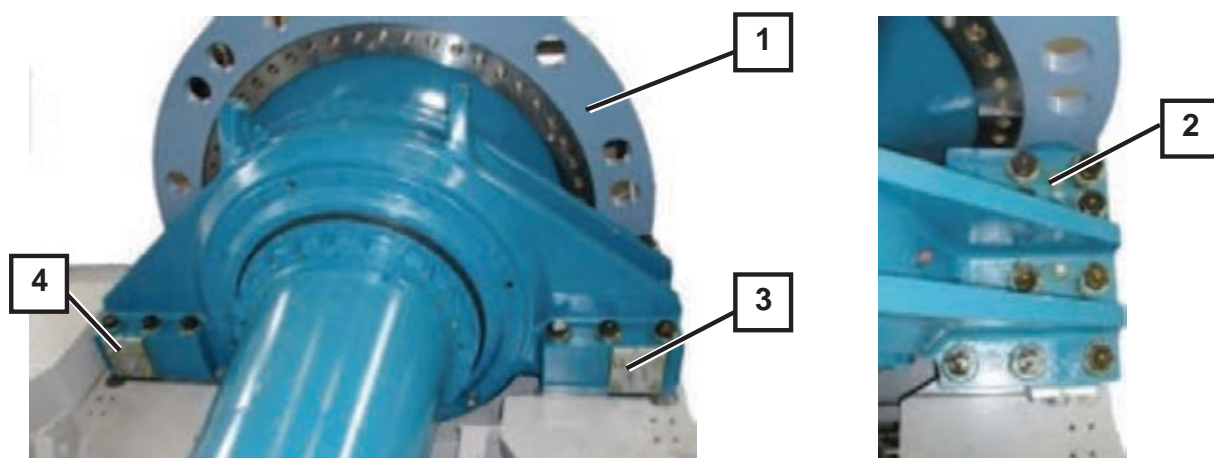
Rotor shaft with rotor lock disk (WTs of turbine class K07)
